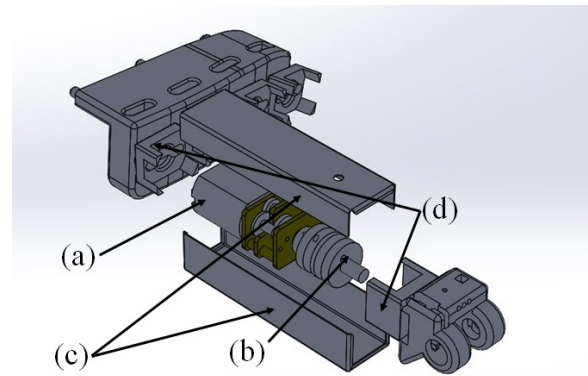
Configuration of the WDMBIS: (a) actuator, (b) pulley, (c) casing, and (d) end joints of the carpus and finger parts.
